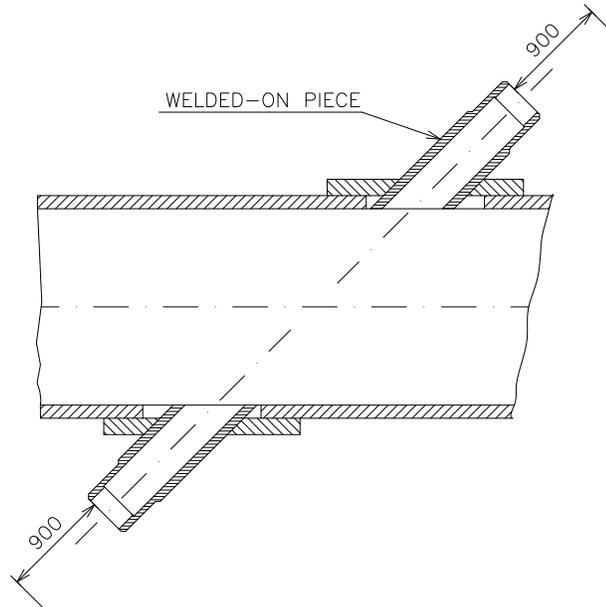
Required free room in the vicinity of welded-on pieces
